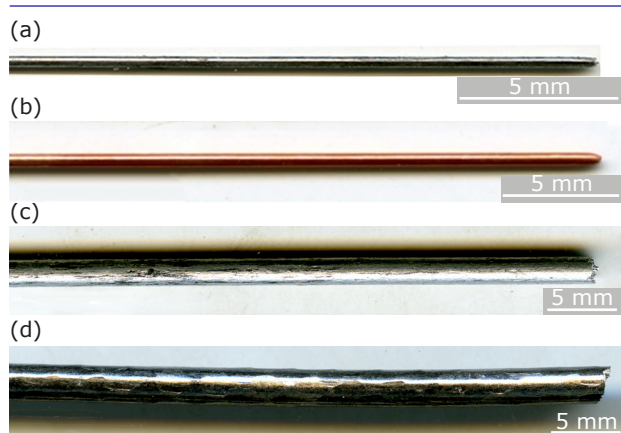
Back surfaces after tensile testing at room temperature: (a) cold drawing iridium wire, diameter 0.5 mm (elongation 29%, necking 23%); (b) annealed copper wire, diameter 0.75 mm (elongation 58%, necking 55%); (c) cold drawing iridium wire, diameter 2 mm (elongation 3.6%, necking 0%); (d) cold drawing iridium wire, diameter 2.7 mm after recrystallisation (elongation 7%, necking 0%)
